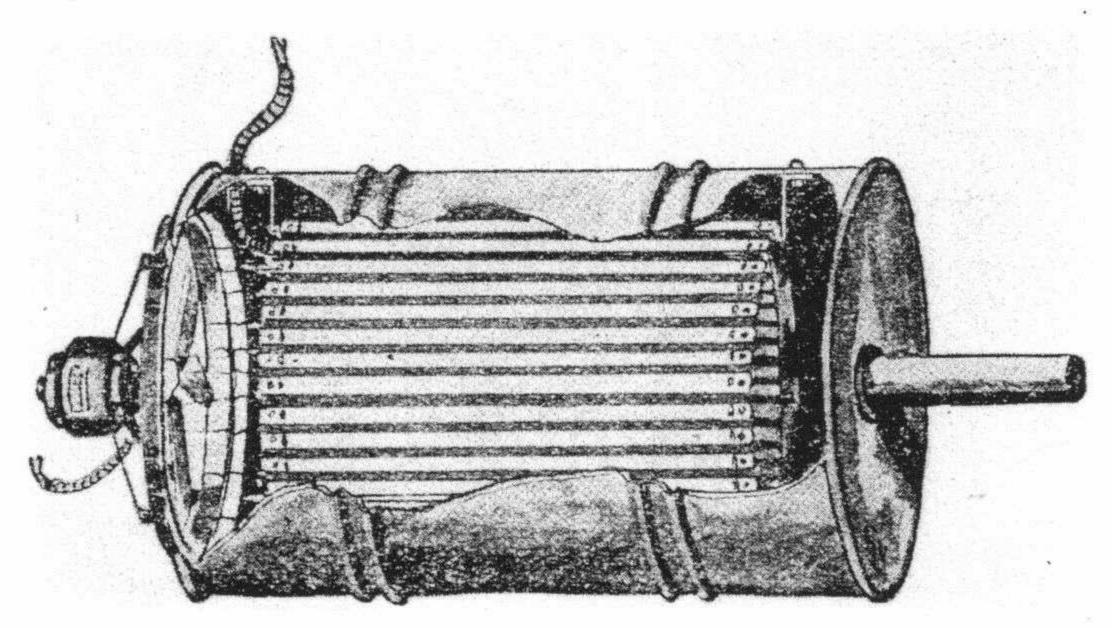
A Heating Unit Readily Assembled from Space Heaters and Fan Mounted in an Oil Drum
